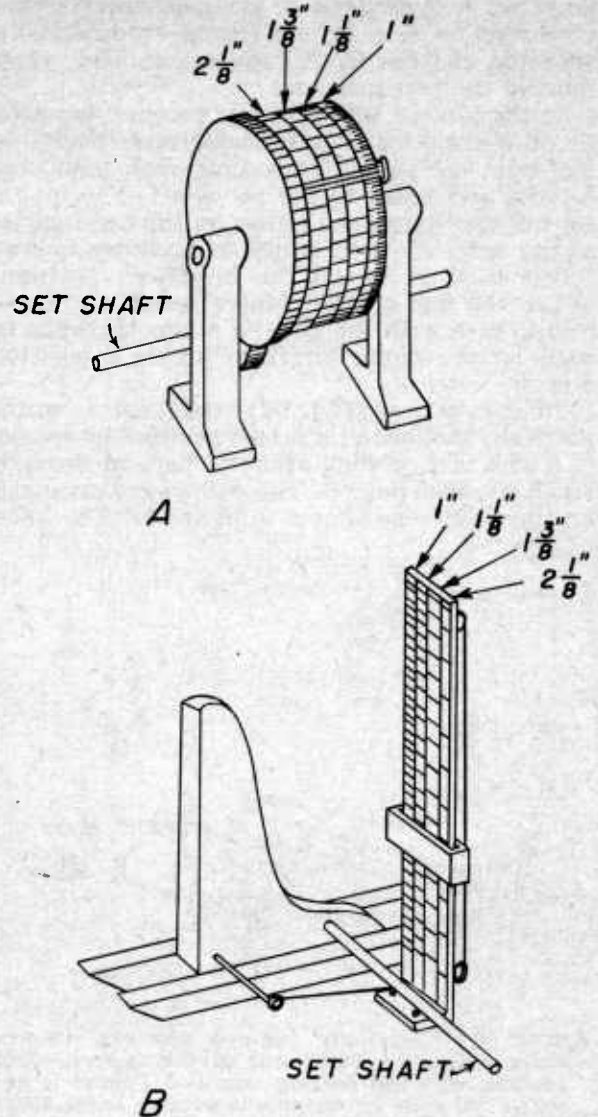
Types of indicators showing the number of boards of a given thickness that can be taken. A, Cylinder type; B, board type.
